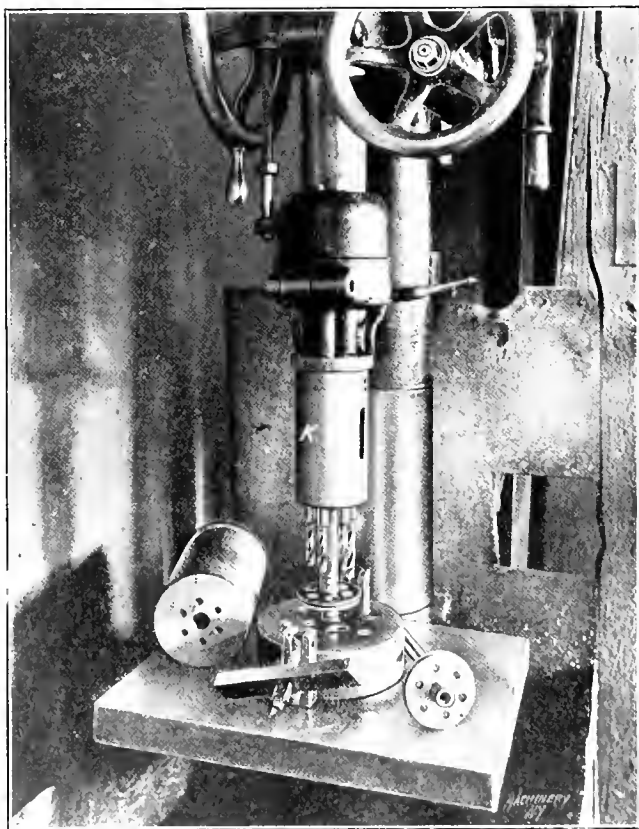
Multiple Spindle Attachment for Drilling the Rivet Holes in the Spindle Flange and Bowl
